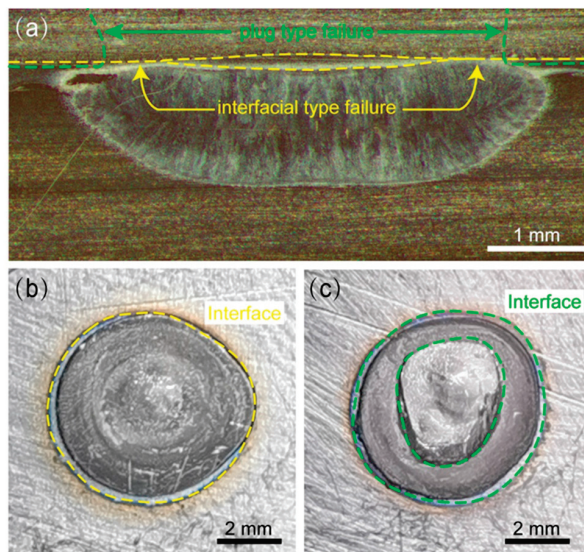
Fracture interface morphologies and fracture locations: (a) nugget morphology of the joint, 8.0 kA, 180 ms, 0.35 MPa, (b) macroscopic fracture interface of interfacial fracture mode, 7.0 kA, 150 ms, 0.35 MPa, and (c) macroscopic fracture interface of button fracture mode, 8.0 kA, 150 ms, 0.35 MPa.
